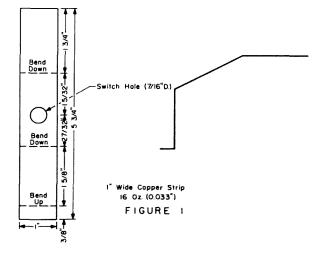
A template of the copper brocket constructed to place the DPDT SSB-AM switch near the antenna trim control shaft. Copper was used because of its availability and ease of soldering.
